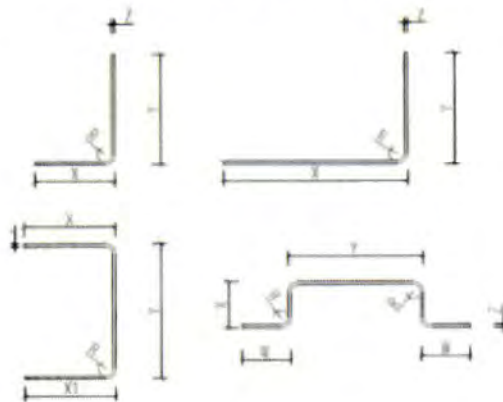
Examples of steel shapes with anti-corrosion ZM coating, used to construct the AGS grid system.
